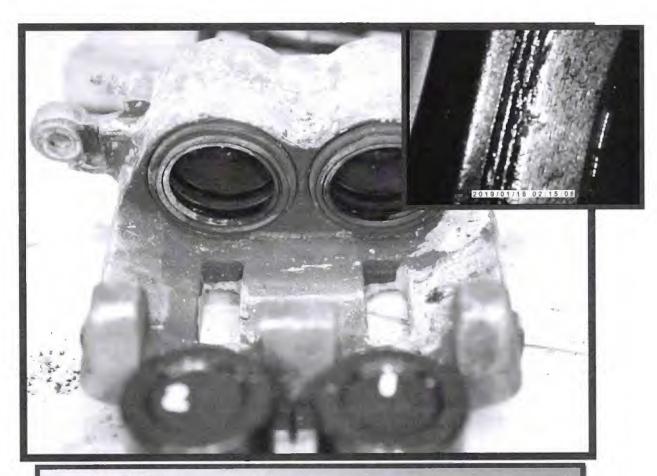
This photograph depicts the right front disc brake caliper of the 2001 Ford Excursion stretch limousine during the period of individual component analysis, following removal of the caliper pistons to allow for examination of the pistons, caliper body bores, and piston seals. As with all front braking system components, the effects of severe thermal distress were clearly evident -- including the intense pungent odor of burnt materials/components.
